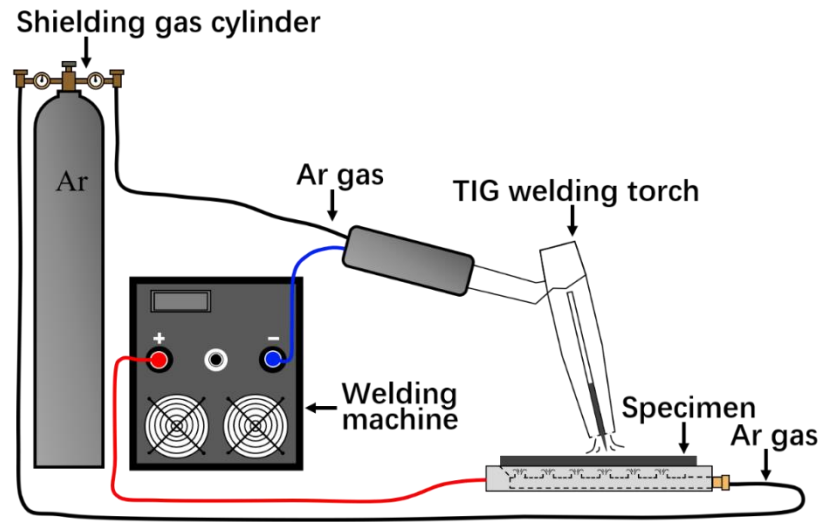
Schematic representation of the experimental setup used for gas tungsten arc welding.
